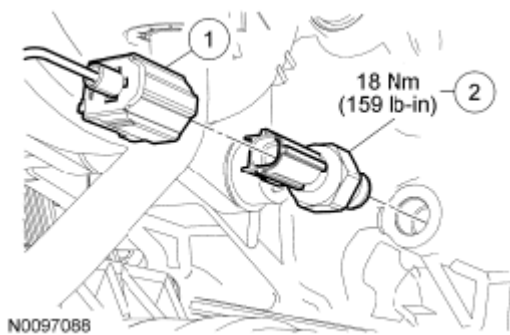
Identifying Engine Oil Pressure Switch Electrical Connector & EOP Switch With Torque Specifications
